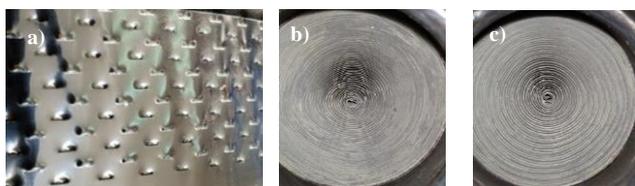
Prototype filter: a) perforations of metal sheet, b) filter inlet, c) filter outlet
